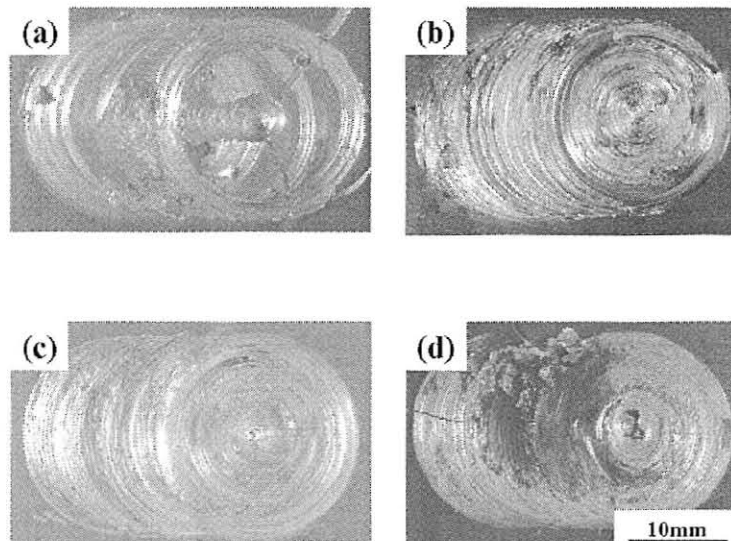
Appearance of the stir-in-plate welded specimens: (a) 60rpm, 100mm/min, (b) 80rpm, 100mm/min, (c) 150rpm, 100mm/min, (d) 170rpm, 100mm/min.
